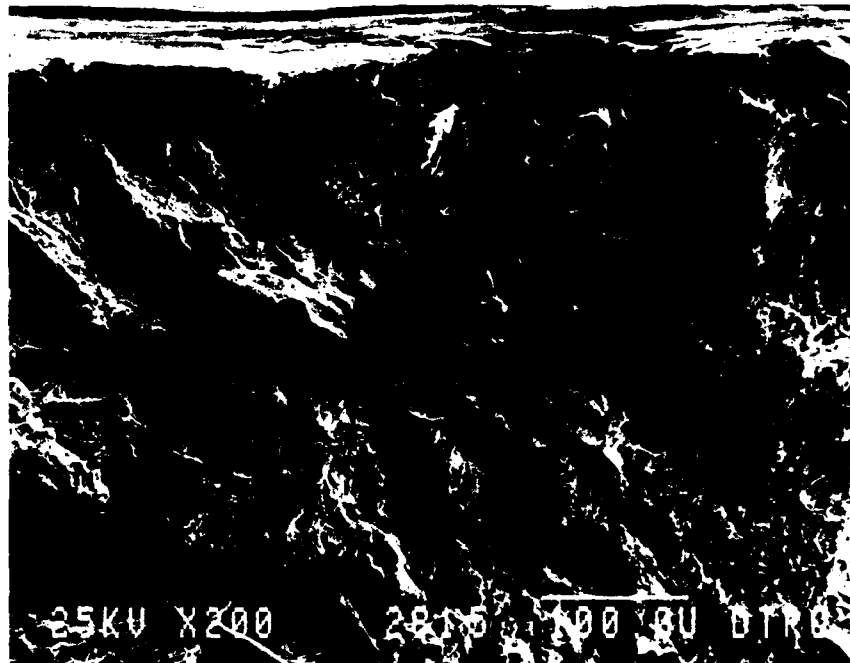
Example of inclusion-initiated fracture of a notched bend specimen from weld B44 (Specimen B44-27).
